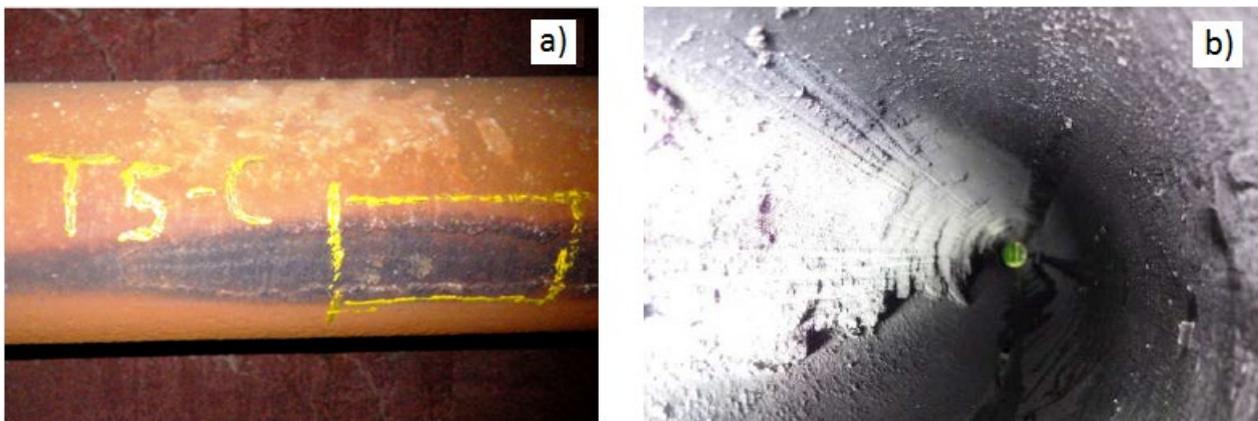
External burning (a) and carbon sediment on tube internal surface (b).
